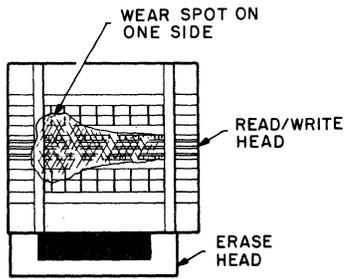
Examples of Unacceptable Head Assembly Wear, Uneven Wear on Read/Write Head
